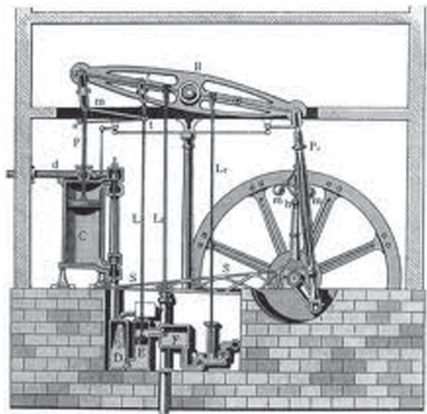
Rotary Steam Engine that uses Fly Wheels
